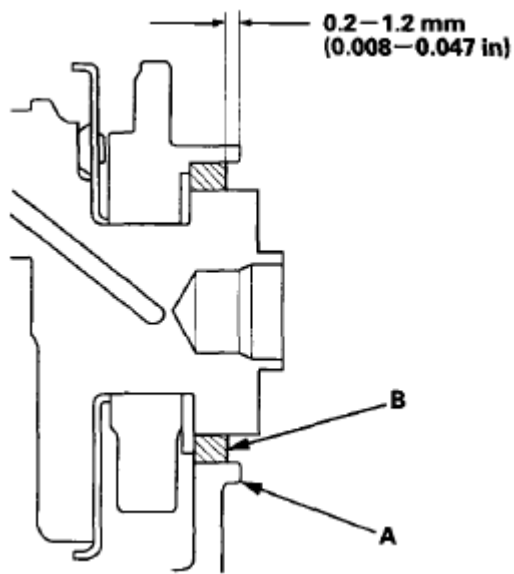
Identifying Distance Between Engine Block And Crankshaft Oil Seal
